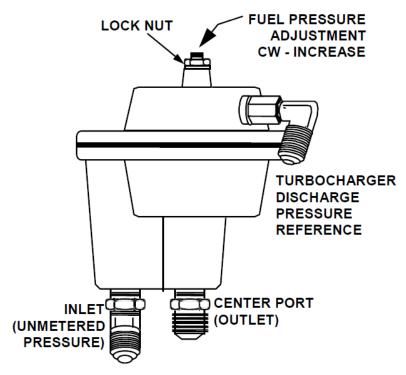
Fuel Pressure Regulator - Turbocharged Engine
